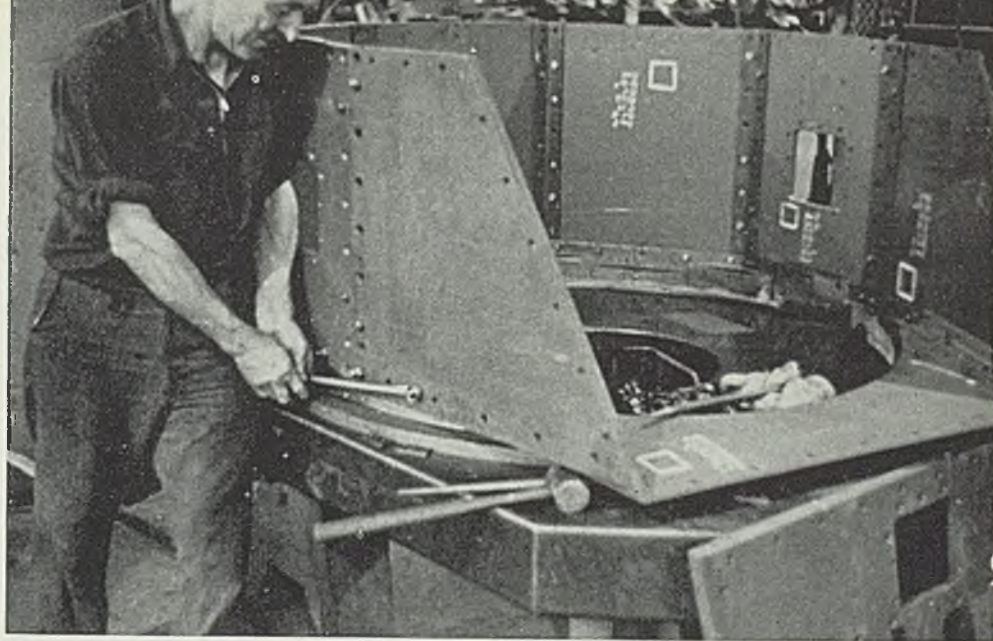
is a rear view of the hull in Fig. 6, showing clearly the engine compartment in the rear of the fighting compartment.
